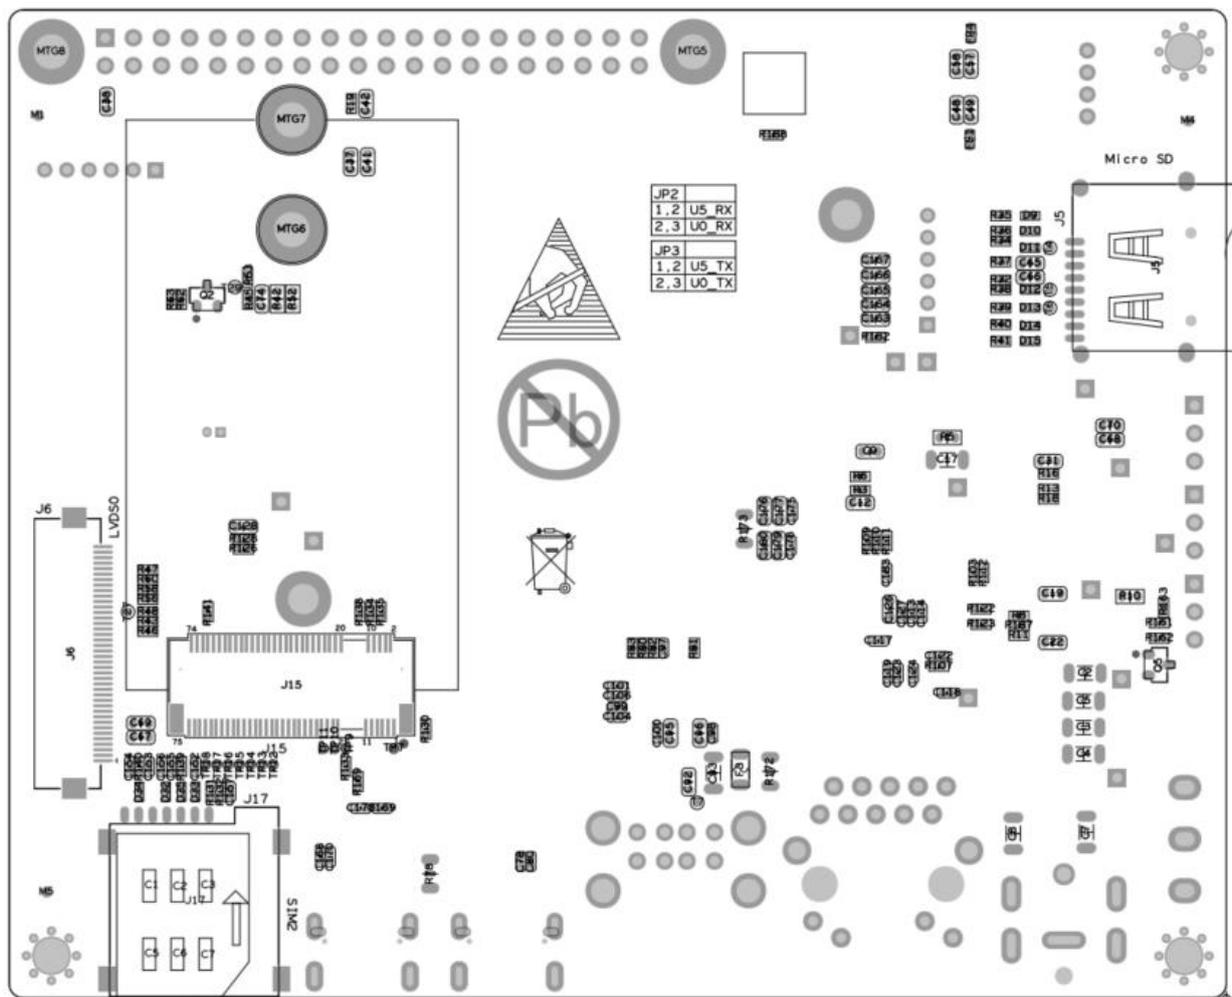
2 MYD-YT113X Interface Layout Bottom View
